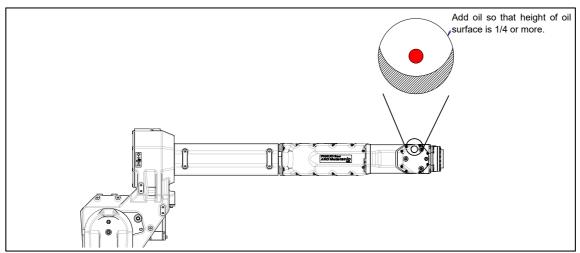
(f) Standard of oil sight glass (supplying oil for J5/J6-axis gearbox) (ARC Mate 120*i*C/12L, M-20*i*A/12L)
